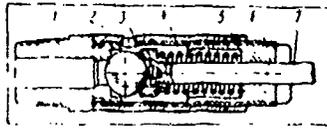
Safety Valve: 1, seat; 2, body; 3, ball; 4, spring; 5, counter nut; 6, adjusting screw; 7, rod
